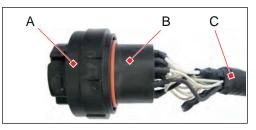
Replacement insert (A) with crimp adapter (B) and connector cable (C)
